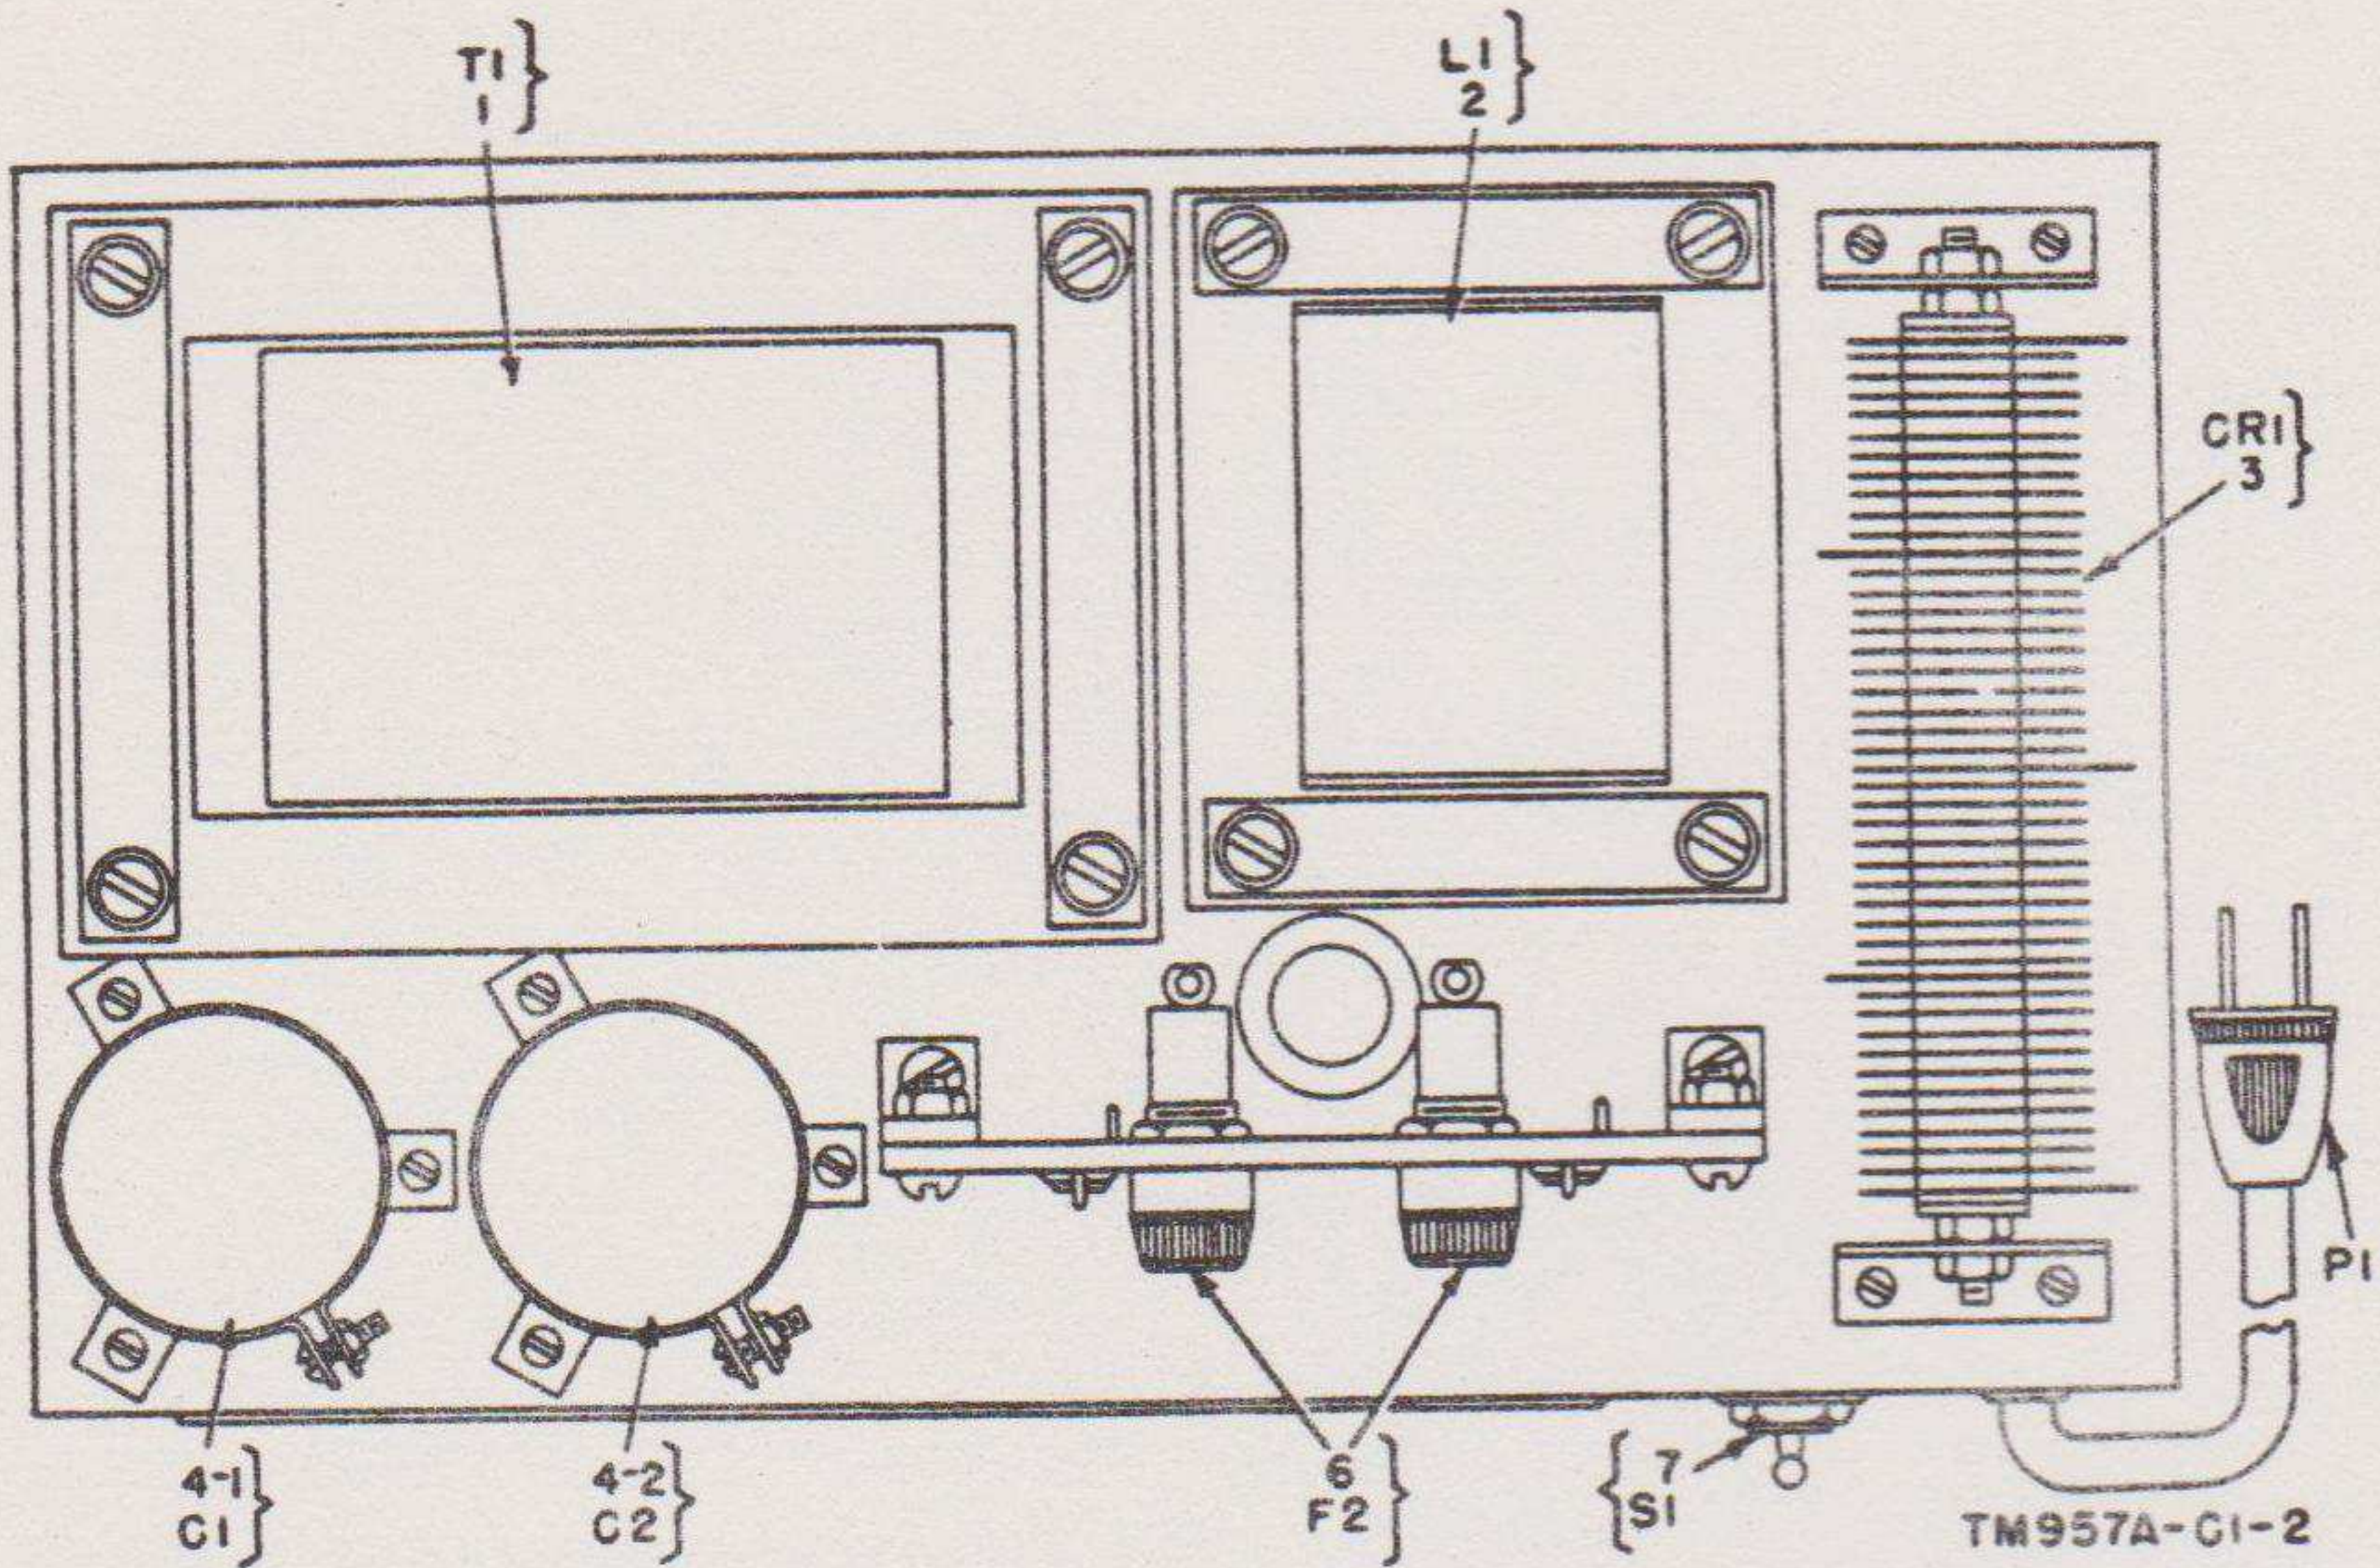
(Added). Rectifier RA-87-A, top view of chassis, parts location diagram.
